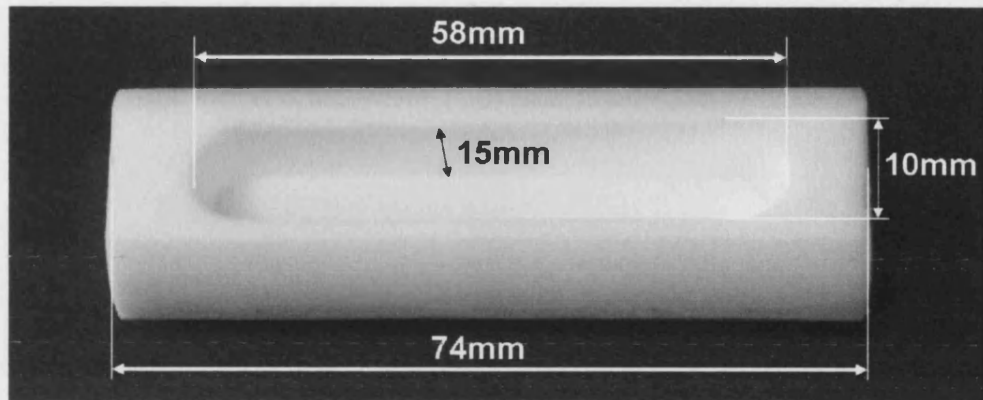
Photograph of the sol-gel mould with dimensions.
